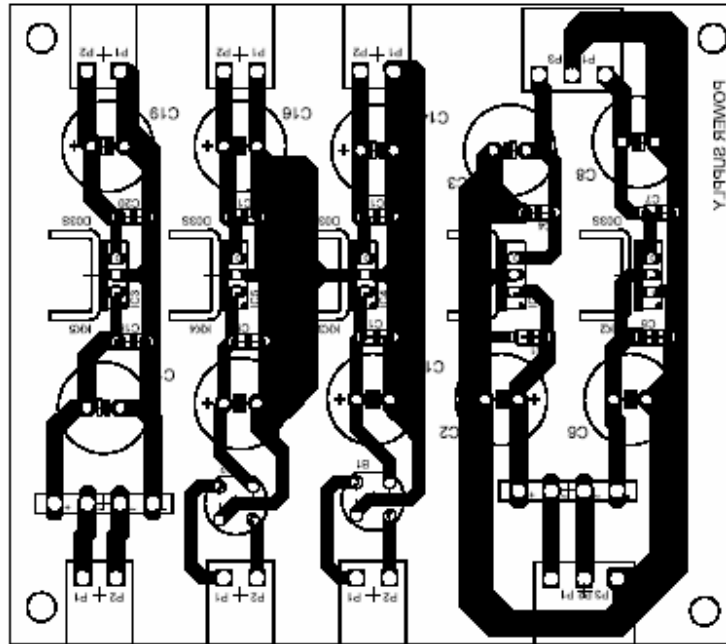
Power supply circuit PCB layout (bottom layer).
